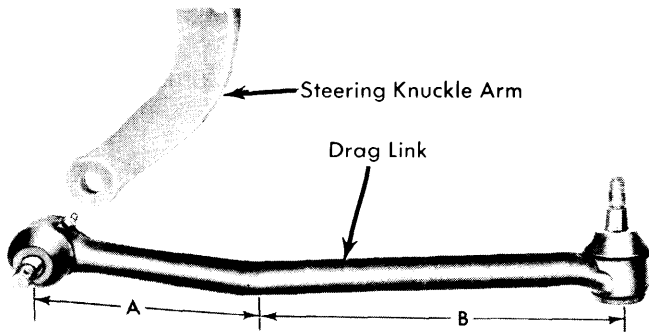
Typical 4WD Steering Linkage Assembly (W100 is Model Being Shown)
